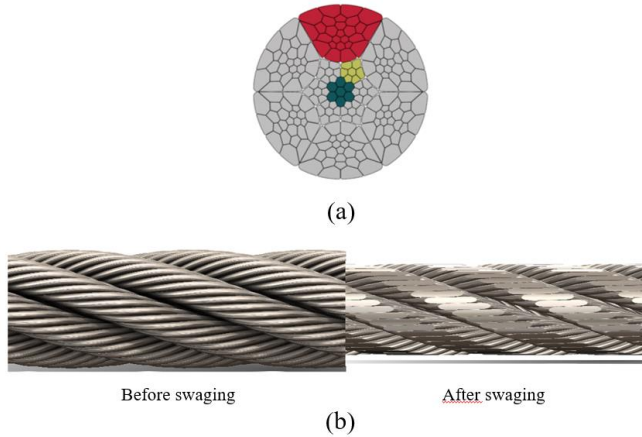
Solidworks drawings of wire rope (a) 2D and (b) 3D drawing images
